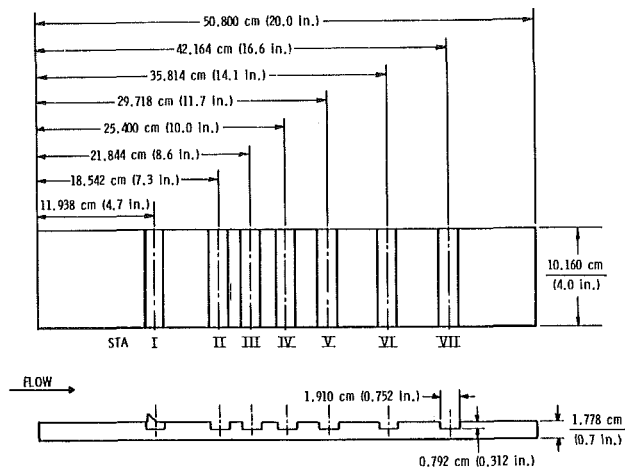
Schematic of tunnel wall insert showing test stations for the protrusions
